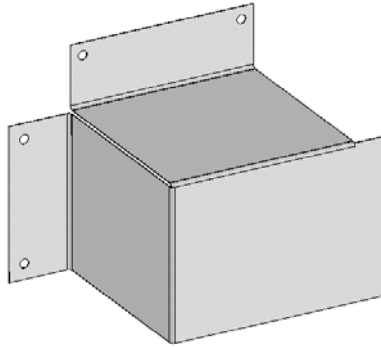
Model after creating edge flanges and holes on the left of the model
